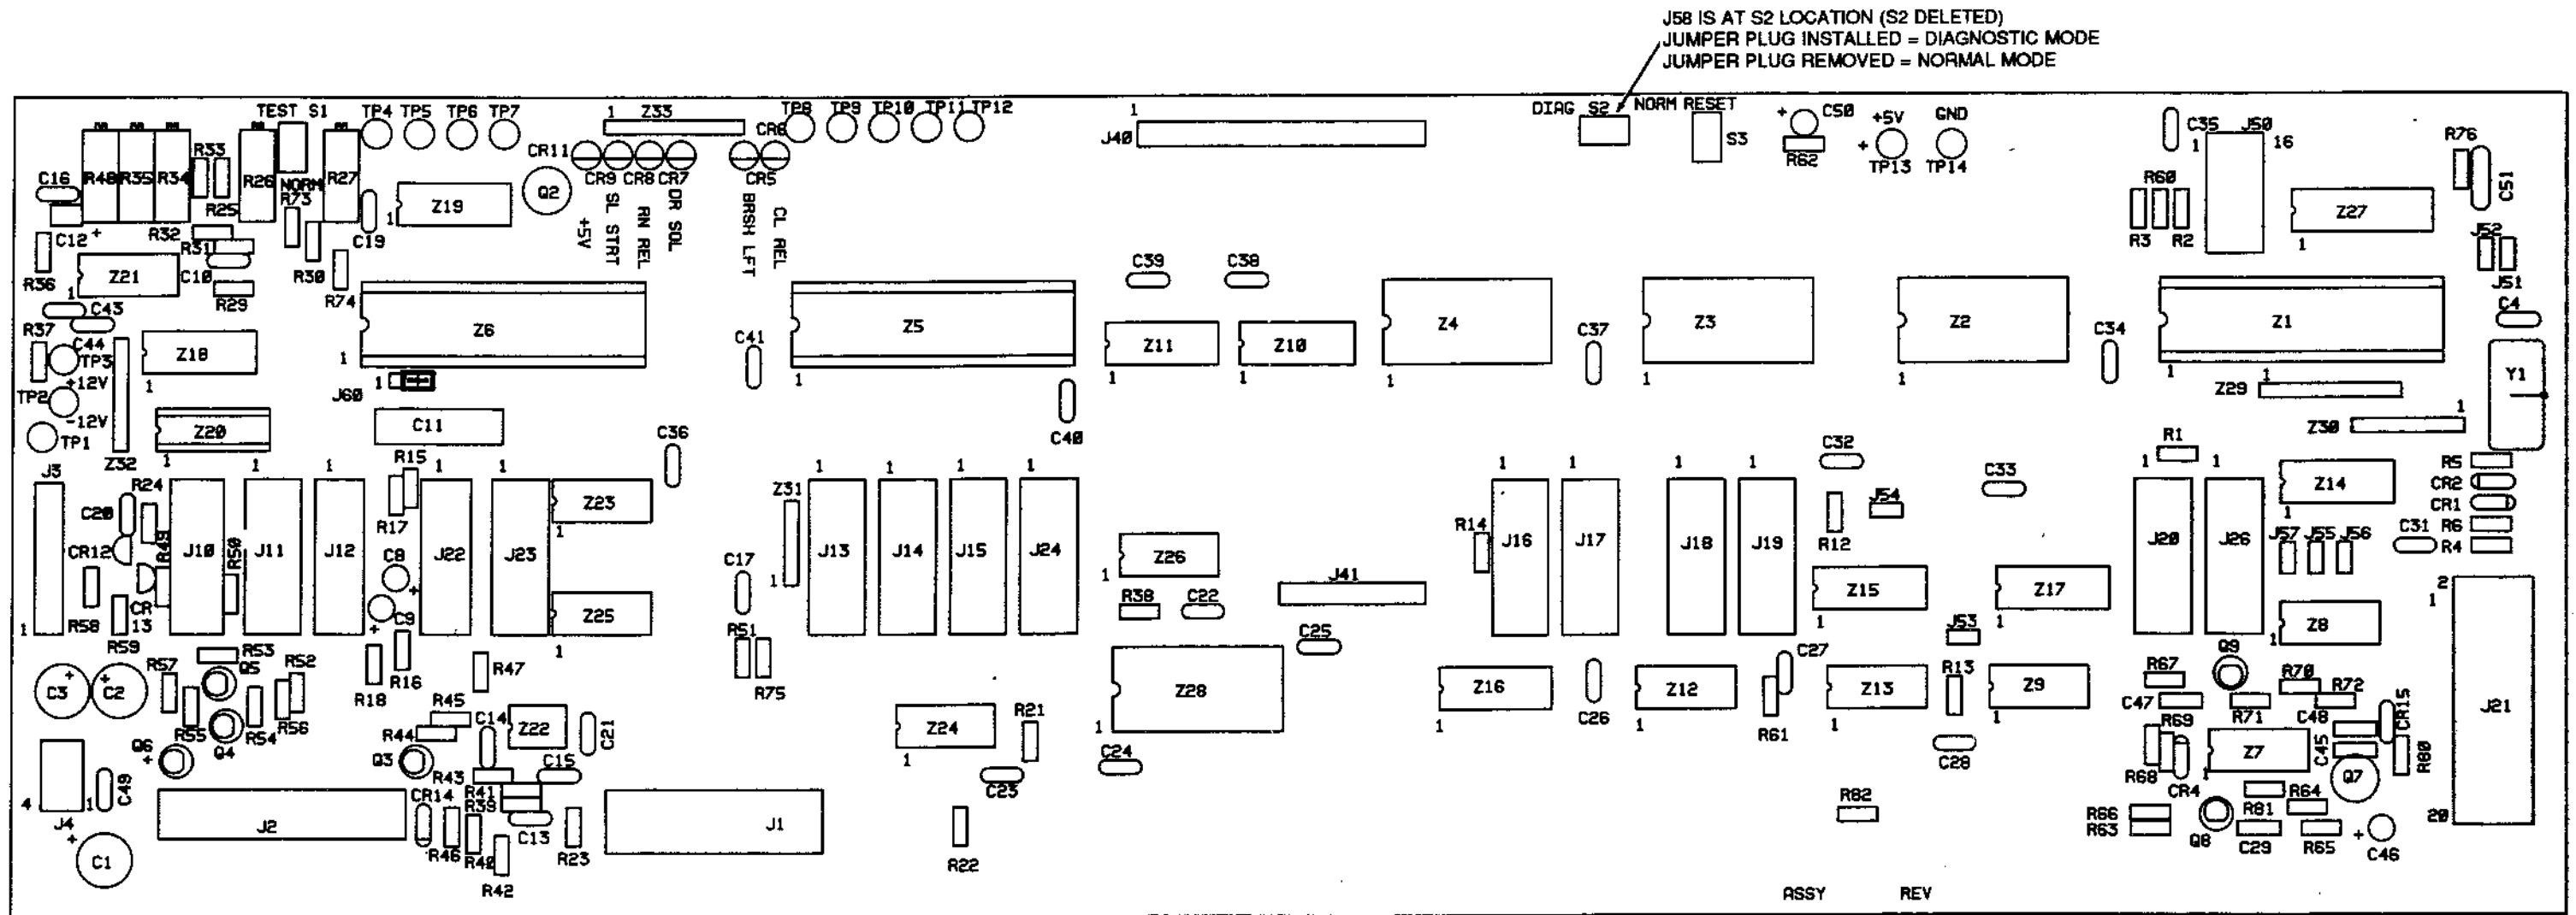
Microcomputer Printed Circuit Board Component Locations, (50673-3)
